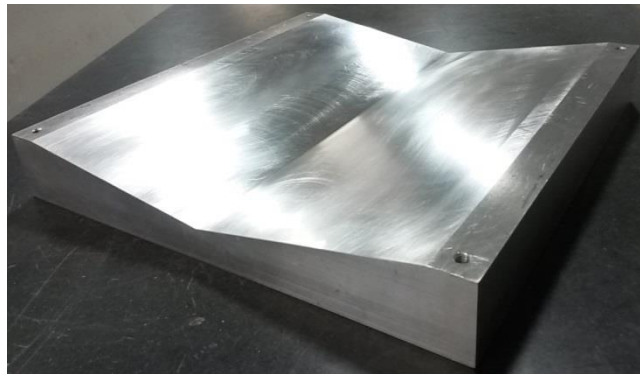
10° Wedge shaped indenter: still photo (isometric view).
